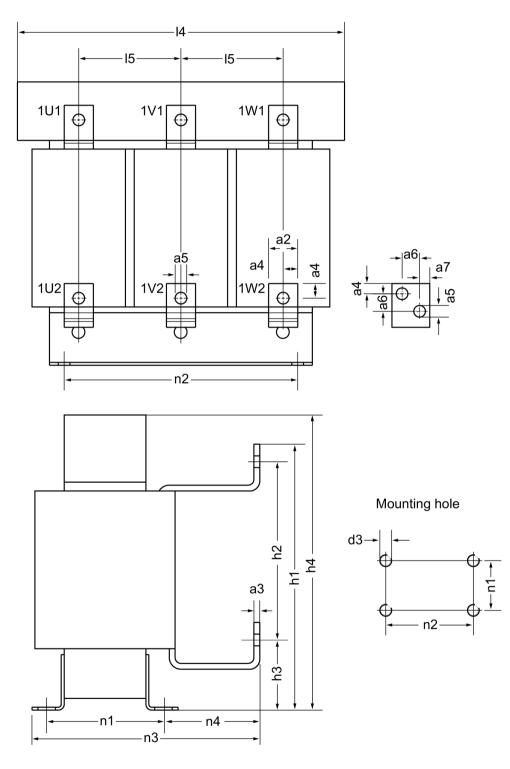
Dimension drawing of line reactors for Basic Line Modules
